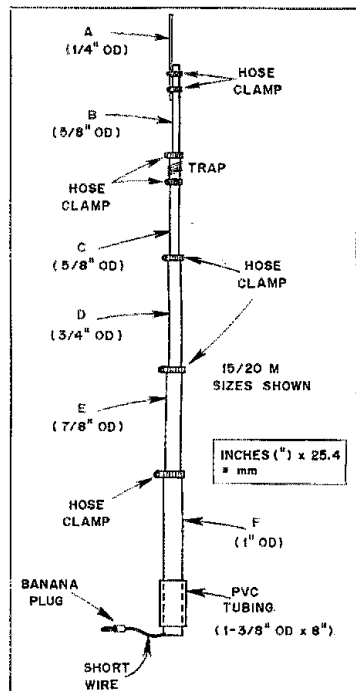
Assembly details for the two-band trap vertical. The coaxial-cable trap capacitor is taped to the lower end of section "B."
